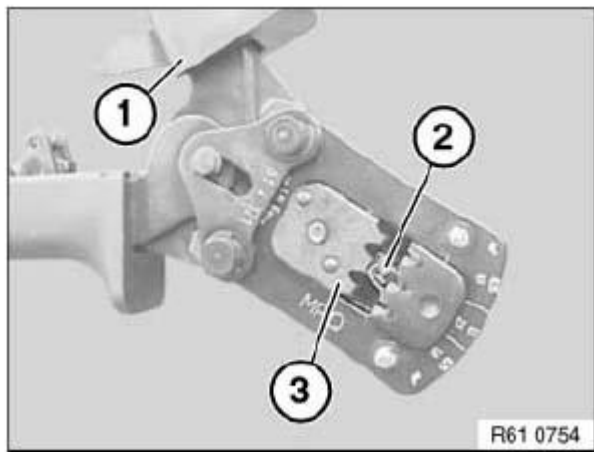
Identifying Pliers, Crimping Head And MPQ Contact
